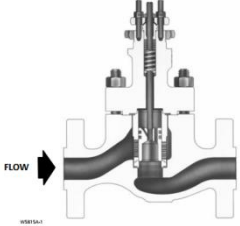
Typical WhisperFlo Trim Cut Section View for Fisher HP Valve
